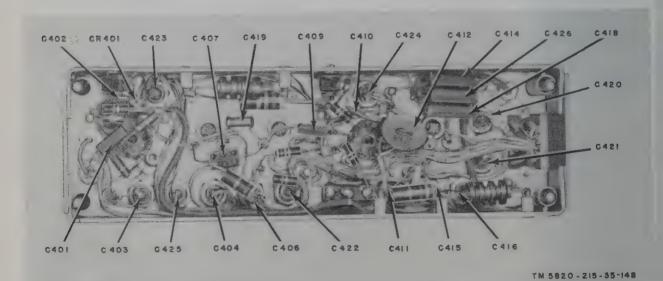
Tsb modulator, alc chassis, bottom view showing capacitors.
